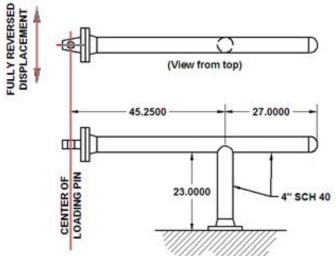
4x4 Markl Test Pipe Assembly for Out-of-plane Loading
